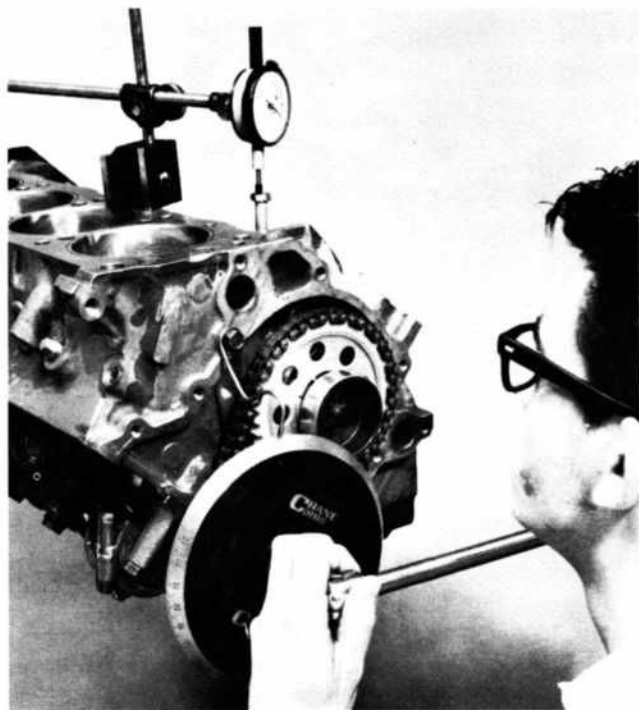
Checking cam timing with bolt extension attached to tappet.
